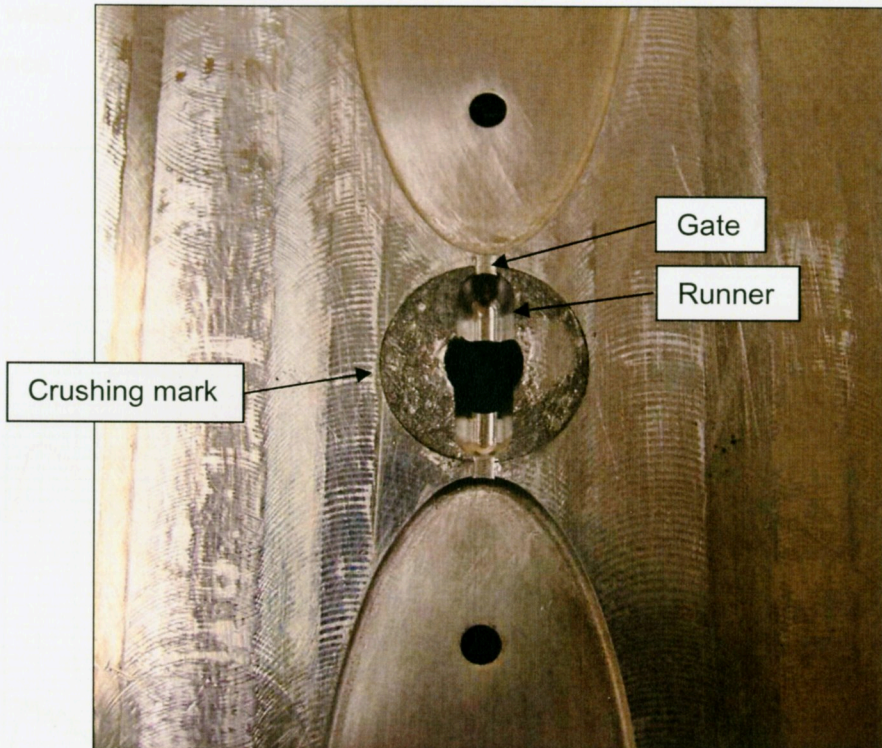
Crushing mark formed by the steel sprue bush on the aluminium insert
